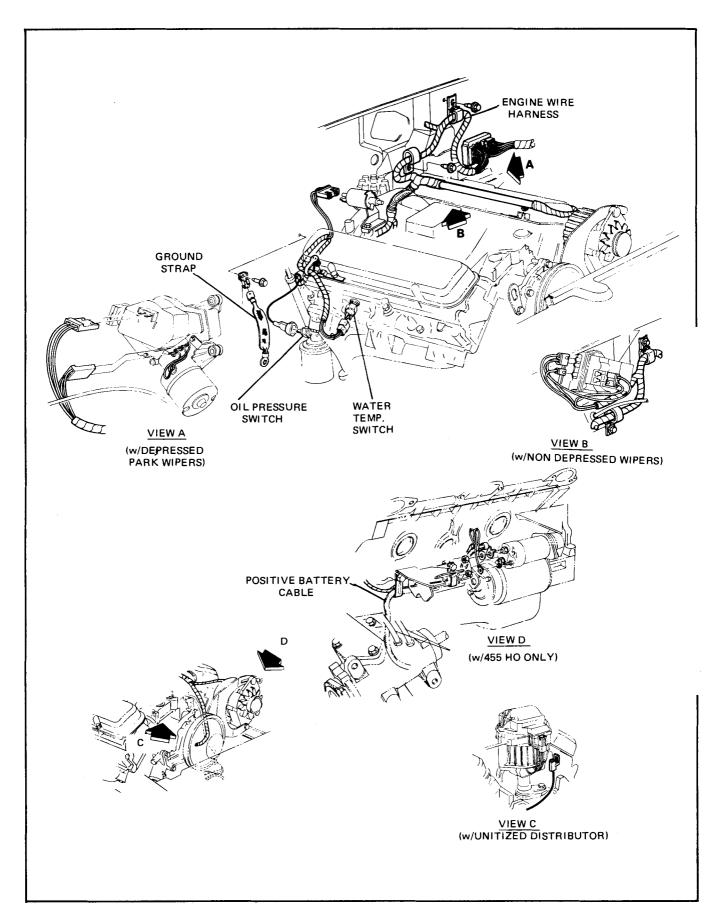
A & G Series (V-8) Engine Wire Harness Installation
